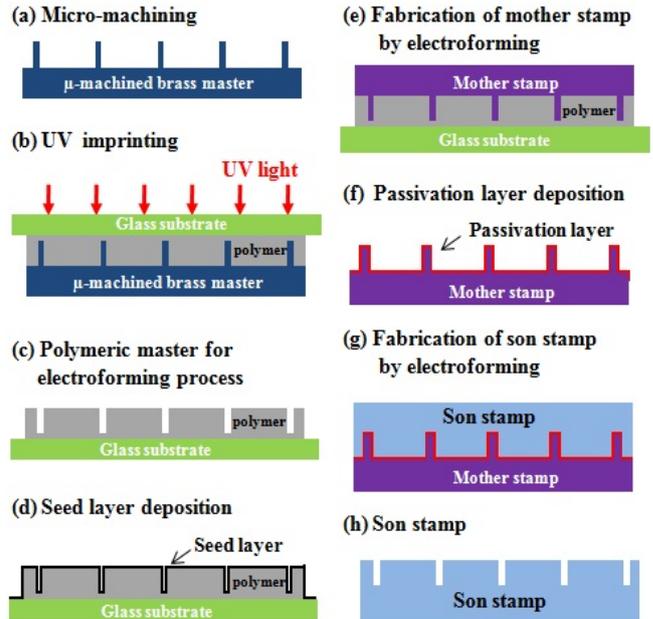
Schematic diagram of fabrication process of large area metallic stamp using UV imprinting and electroforming
